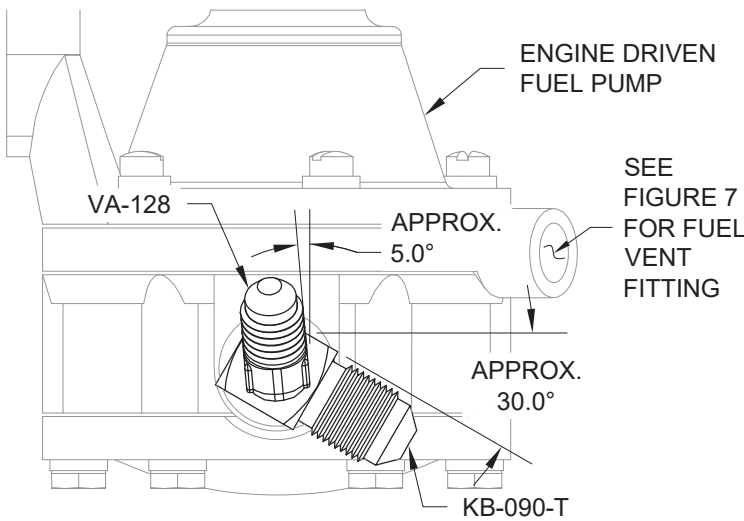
FUEL PUMP OUTLET FITTINGS
